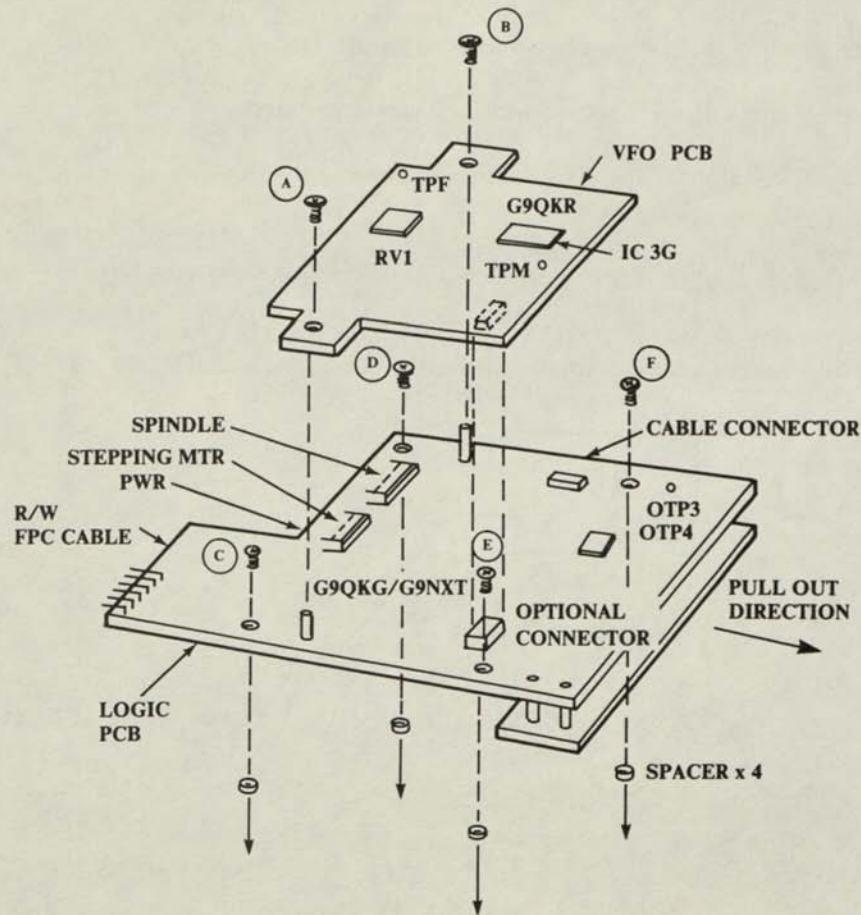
PCB Disassembly/Assembly (Disk Drive)
